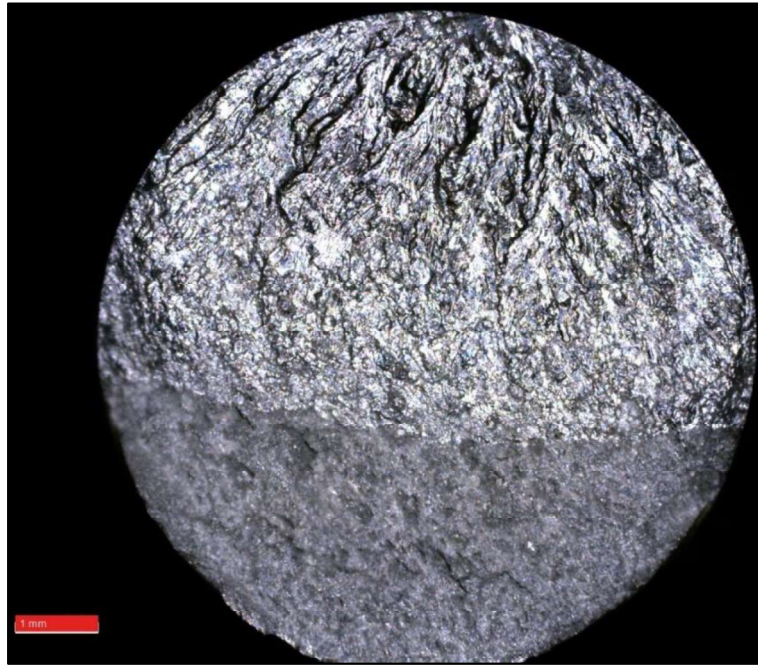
Digital microscope image of CAA-7 fracture surface
